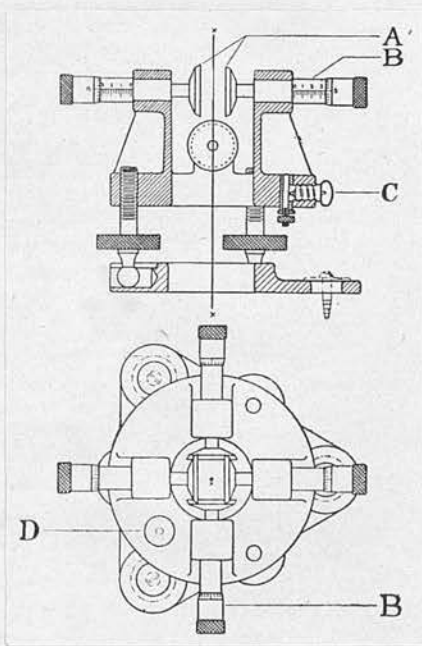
Plan and Section of the Wilson Plumbwire Locator.
